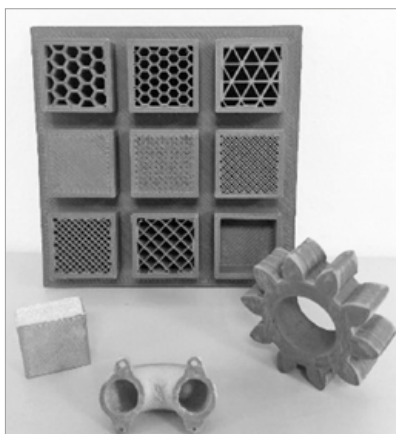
Demonstration parts in the green state, manufactured on the EVO-lizer (Courtesy Evo-tech)
